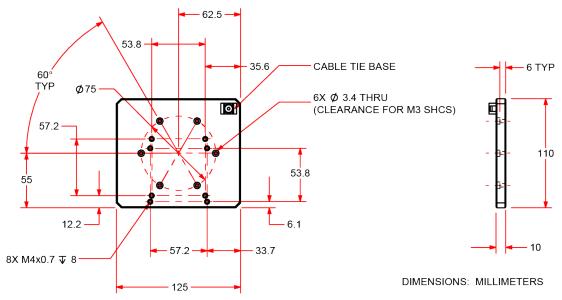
Adapter Plate Dimensions (AP-ANT95R-50G)
